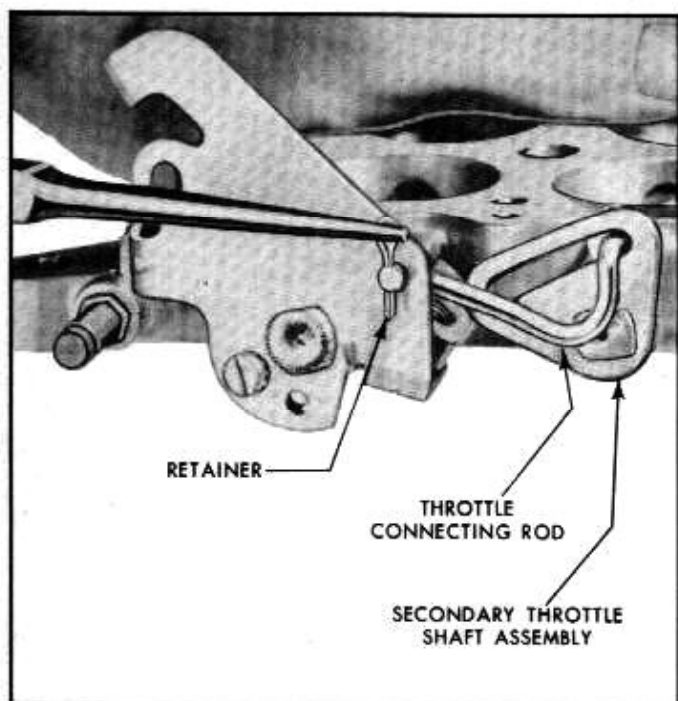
D-46—Removing Throttle Connecting Rod Retainer
